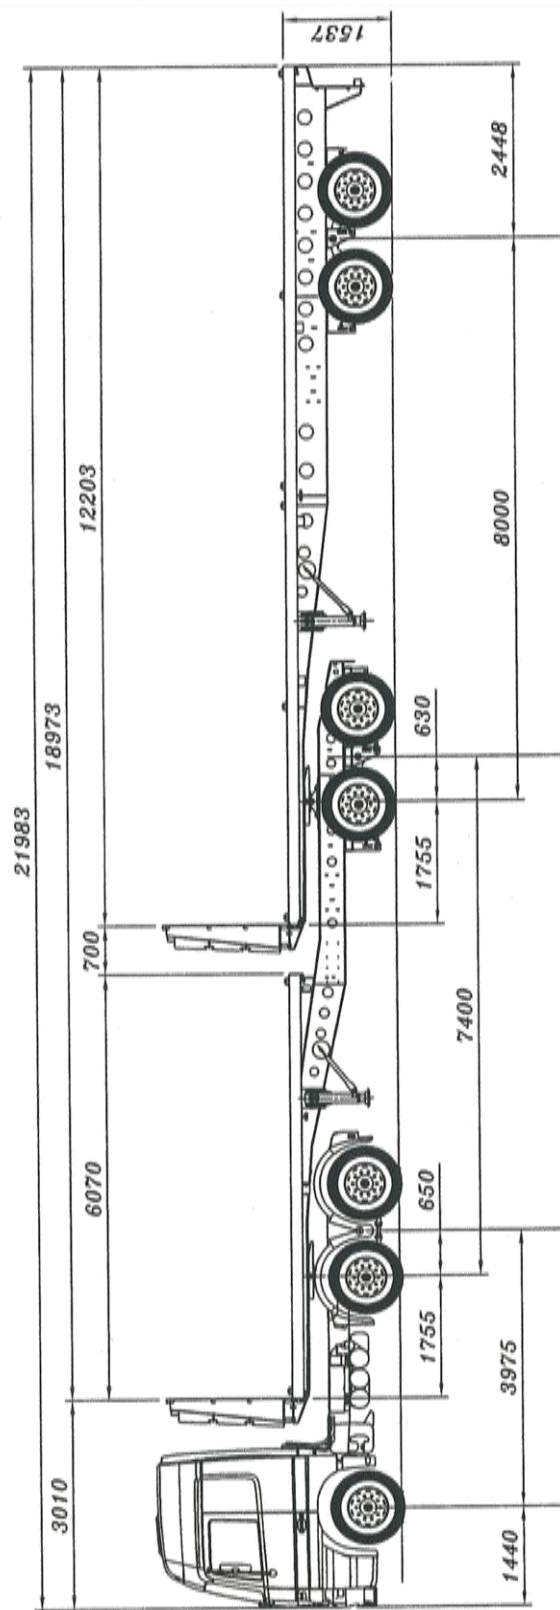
Layout dimensional drawing of the OECD 2 B-double configuration
